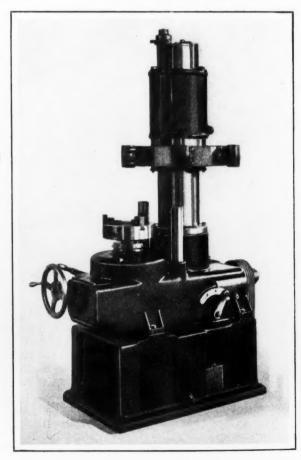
Gleason Straight-bevel Gear Generator for Gears up to 4 1/2 Inches Pitch Diameter
